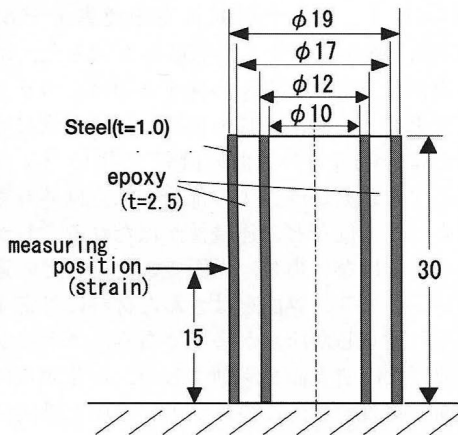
Cross-Sectional View of Test Pieces in Experiments. (unit : mm)
